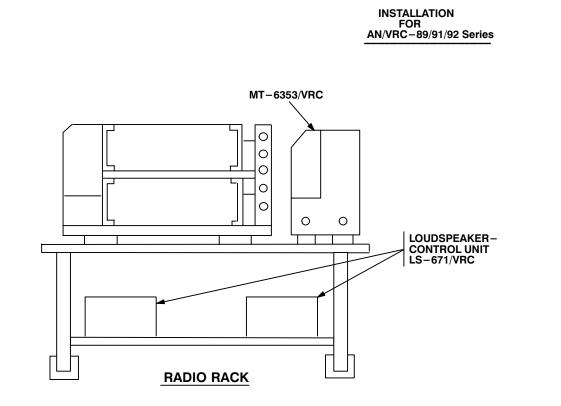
(2). MK and Radio Installation: Radio Equipment Locations
